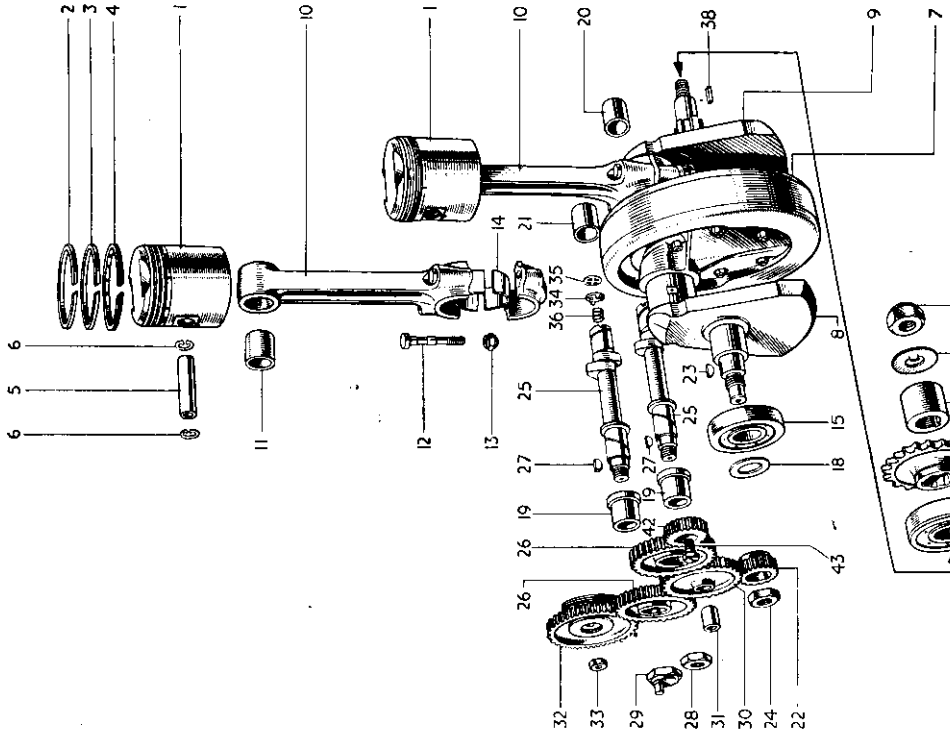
CRANKSHAFT, CONNECTING RODS, PISTONS, TIMING GEARS, etc.
